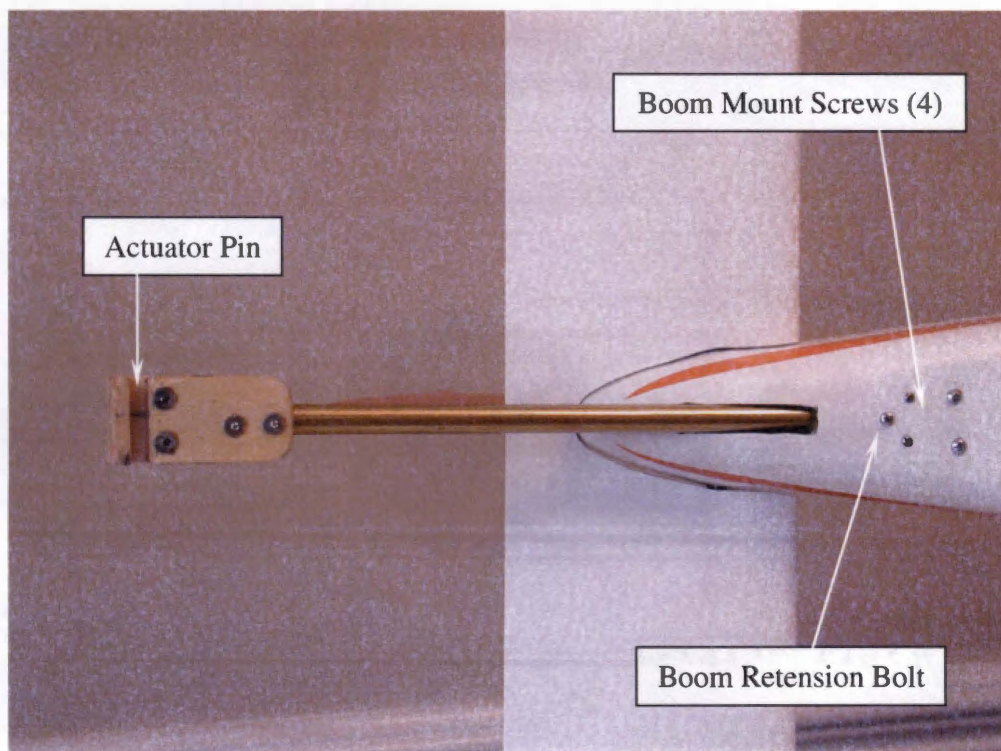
Bottom View of Spin Recovery Parachute Boom and Mount.
